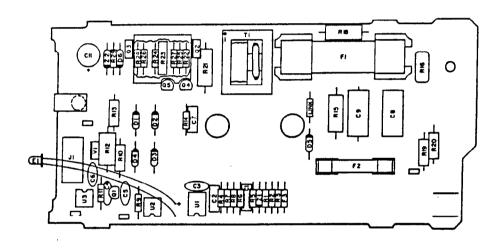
831 Triac Control Board Layout (4-20mA-PA Input Version)
